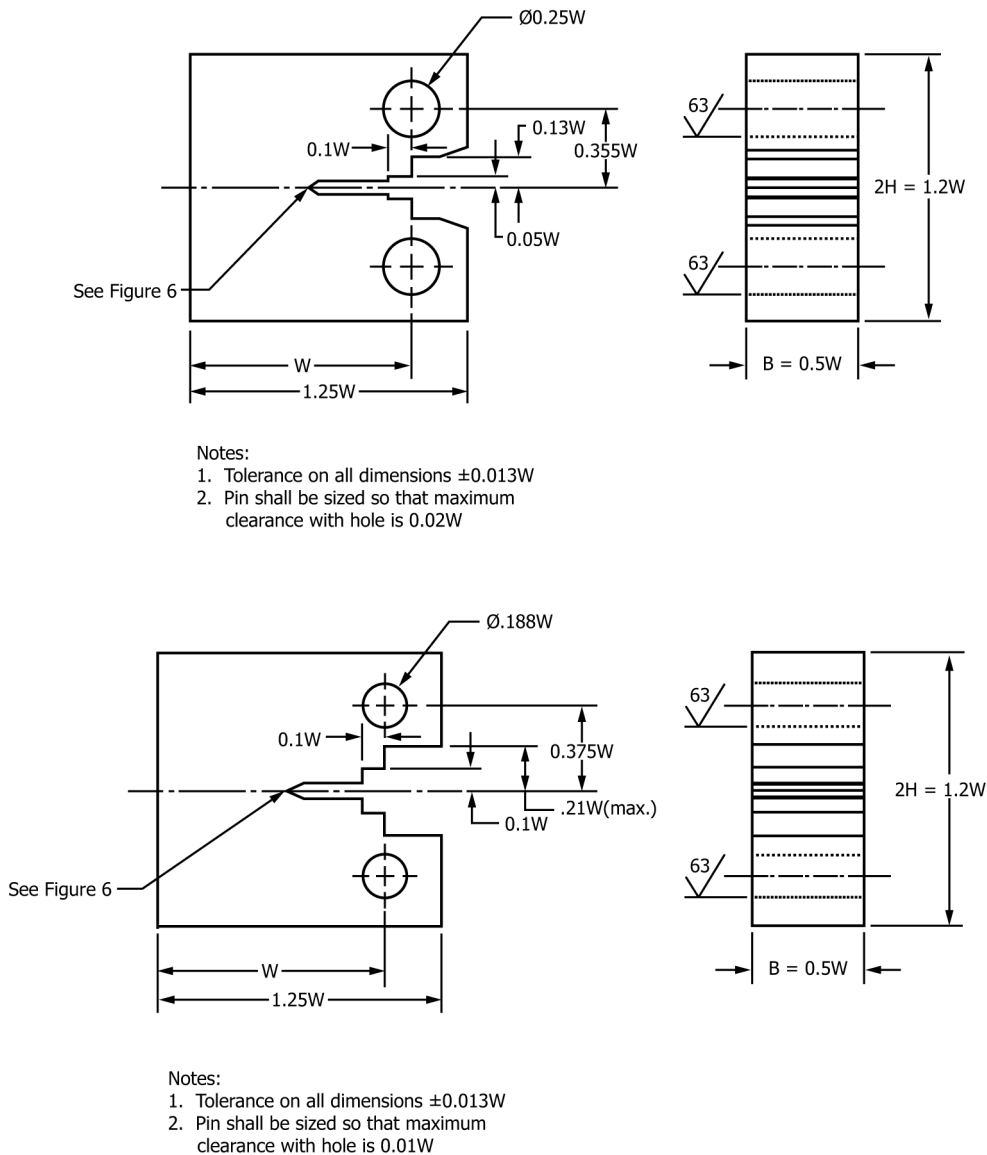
Two Compact Specimen Designs That Have Been Used Successfully for Fracture Toughness Testing
